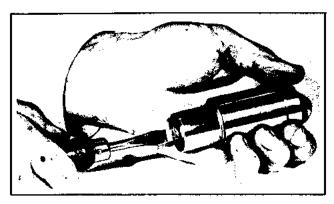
E-70. Installing Crank Pin Pilot on Crank Pin (1963-1976)
